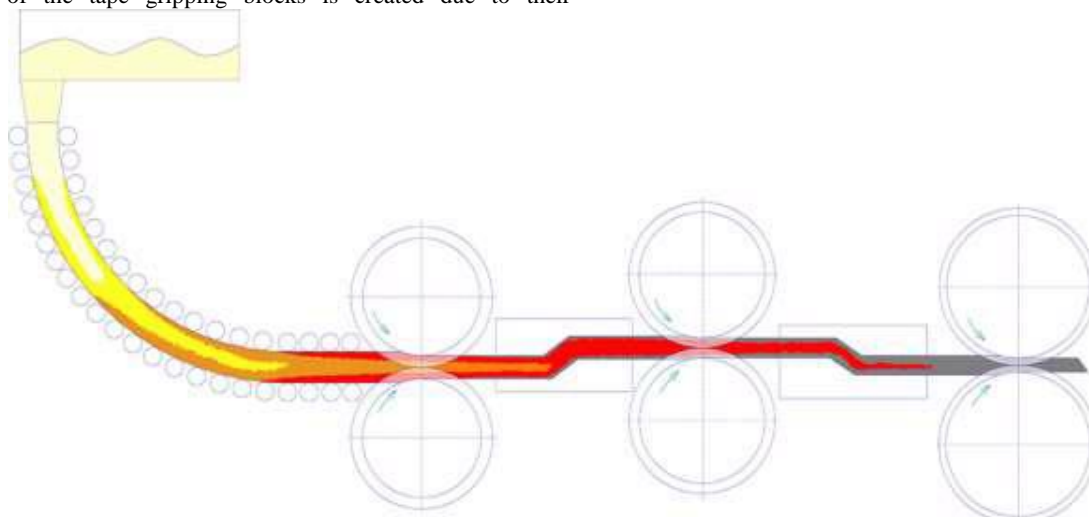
Scheme of the combined process "casting-rolling-ECAP"
